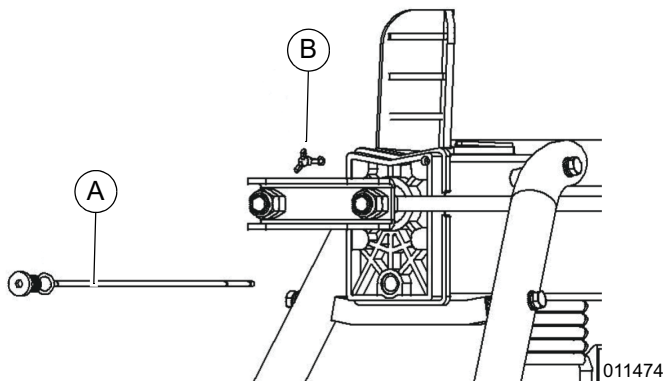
Oil Drain Plug/Oil Dipstick and Air Purge Screw
